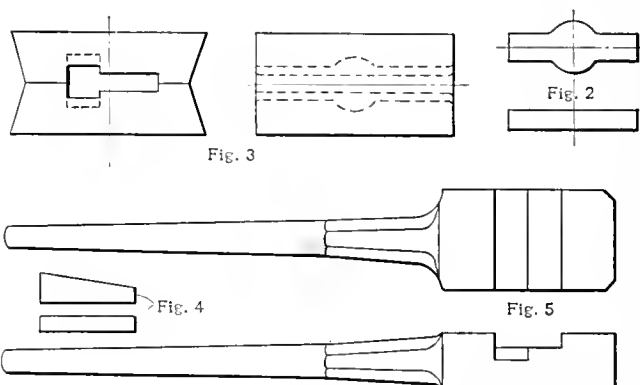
Special Dies used for Economical Forging in the Steam Hammer.
